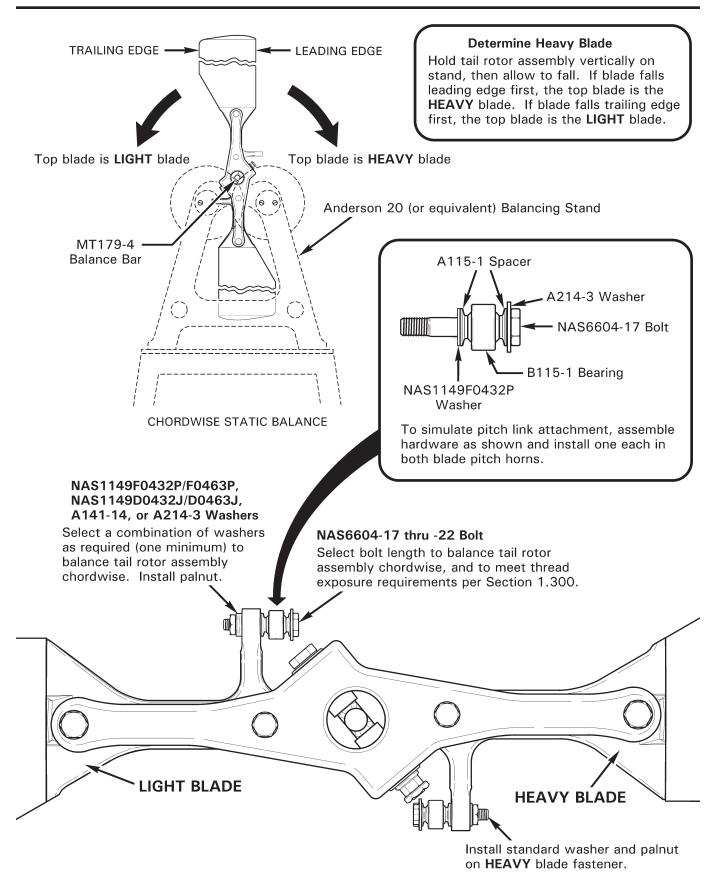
CHORDWISE STATIC BALANCE (C008-9 Tail Rotor Assembly Shown)
